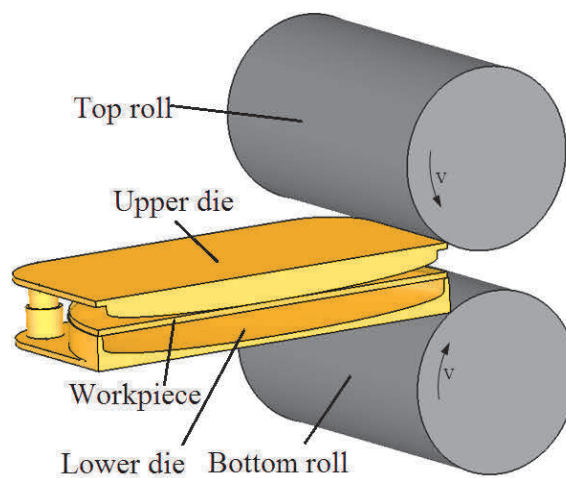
Scheme of the combined process of thick plate rolling and stamping
